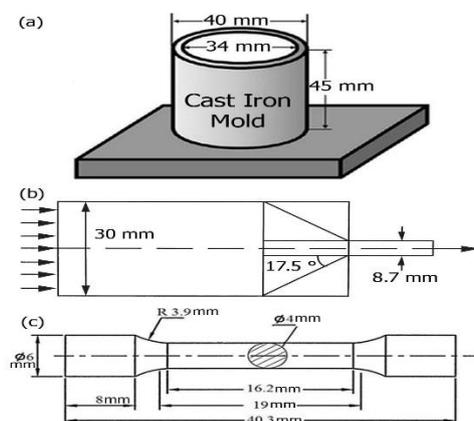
Details of (a) metallic mold (b) extrusion die, and (c) tensile specimen.
